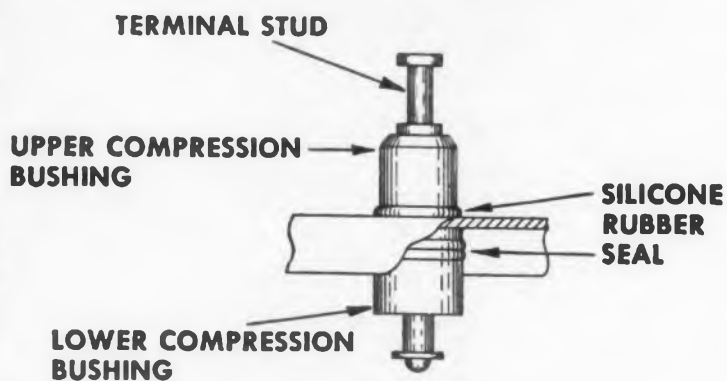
(Top) Terminals installed on a mounting board protect components from vibration and shock.
